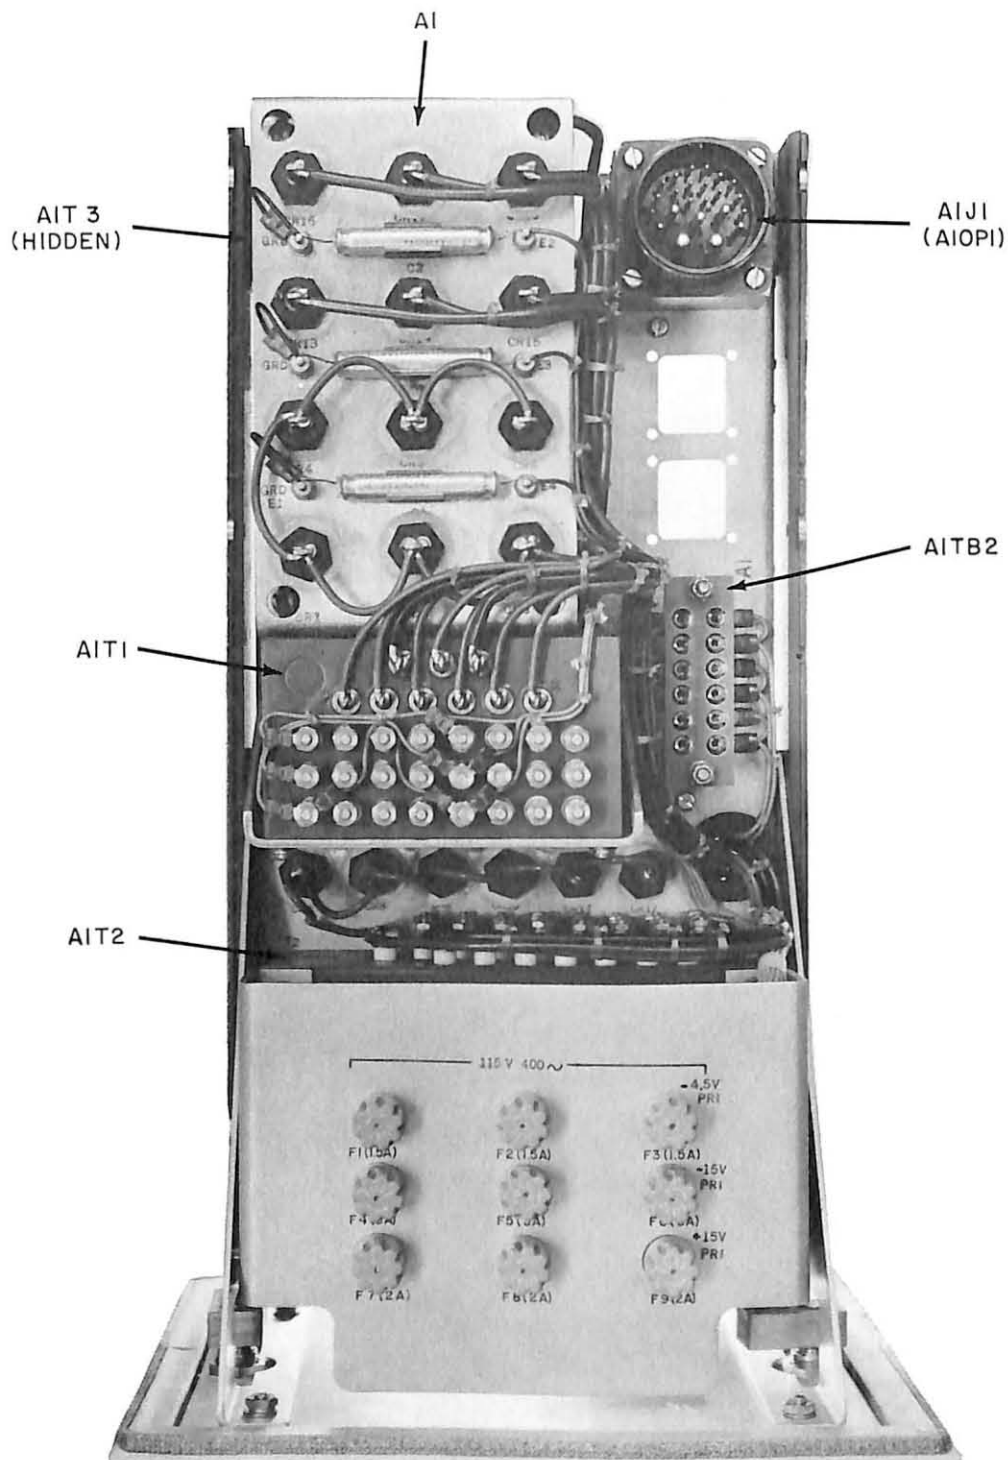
Logic Power Supply Drawer Assembly PS1, Top View
